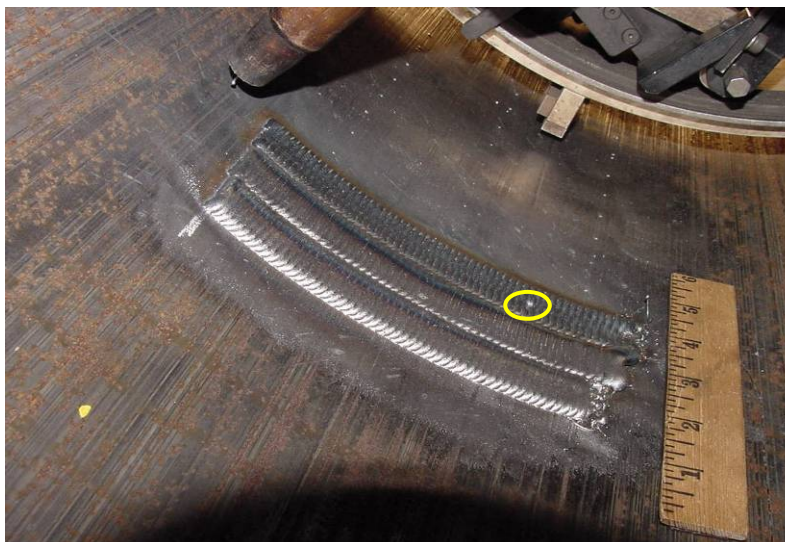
First Pass of First Layer of Deposited Weld Metal on Inside Pipe Diameter
